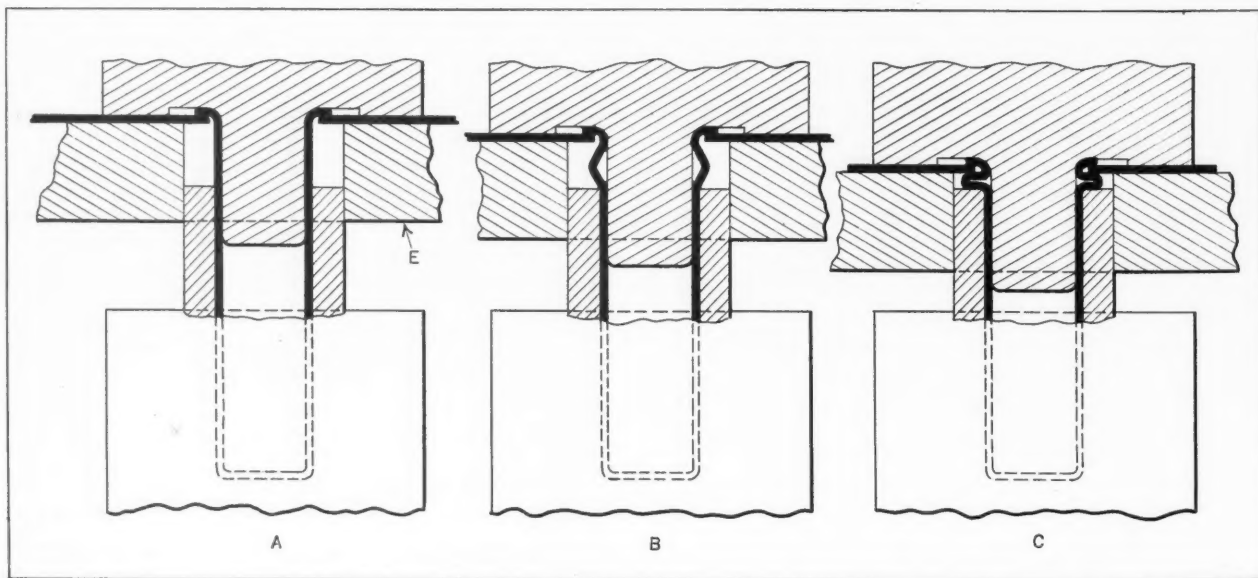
Three Successive Positions of Punch in Assembling Tube and Flange
